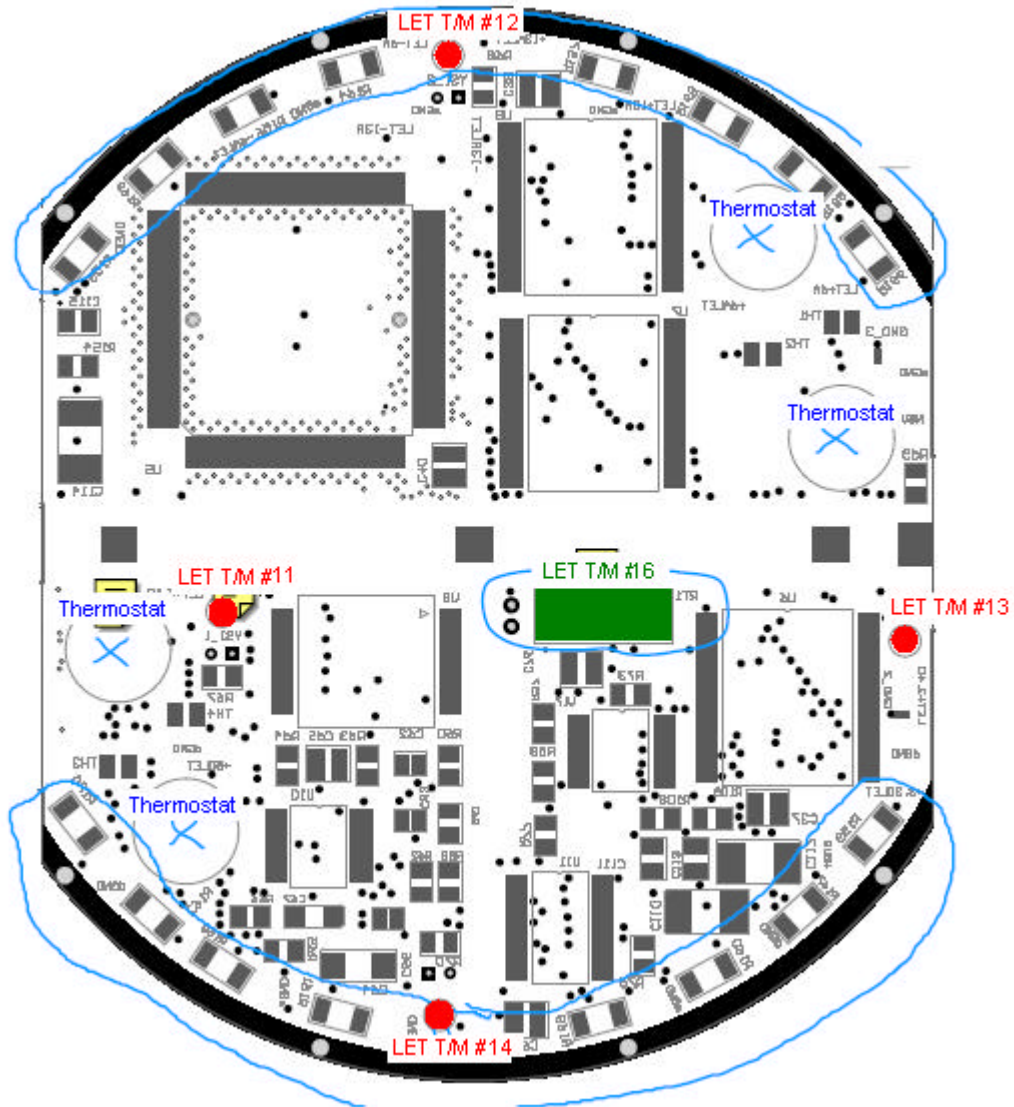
BEHIND LET Thermistor Locations (Through view of top PCB)
